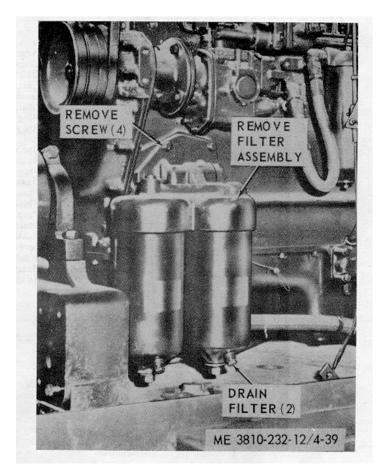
Crane engine oil filter and external lies, .removal and installations.
